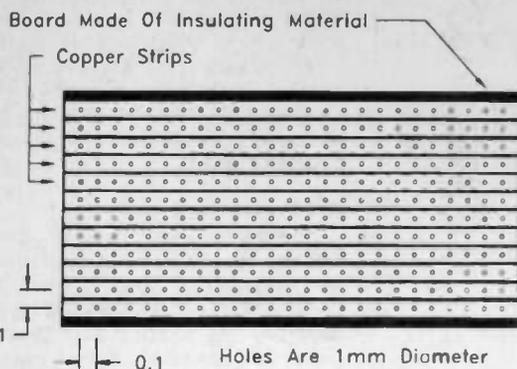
Stripboard has 1mm holes drilled on a 0.1in. (2.54mm) matrix, plus copper strips along the underside.
